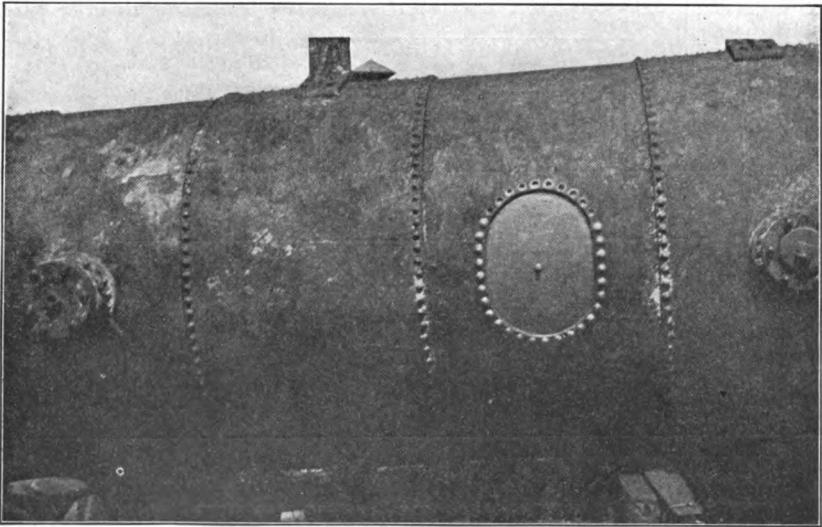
APPEARANCE OF BOILER 303 AFTER TESTING.
